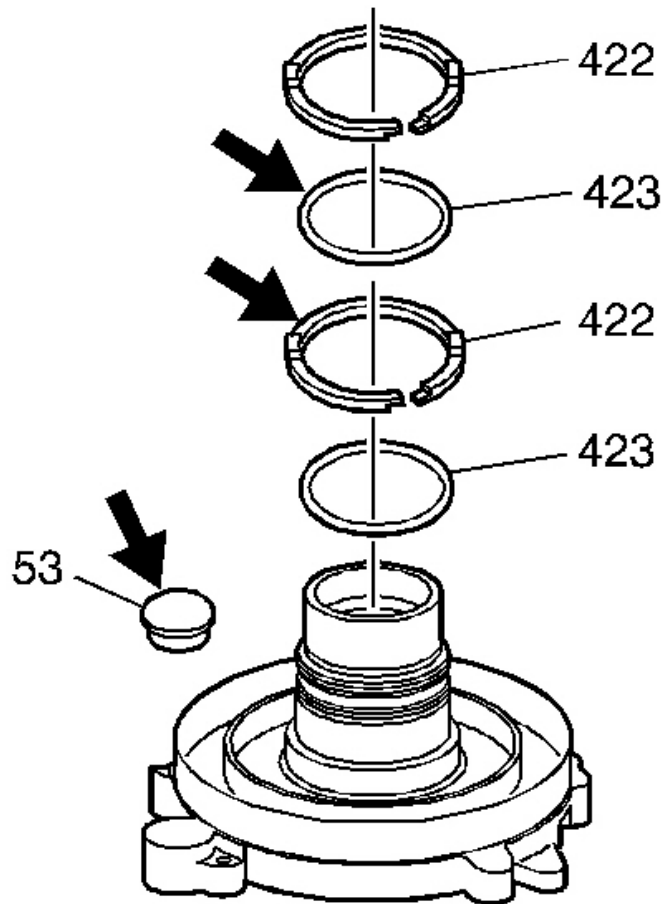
Locating Inspection Points On Sealing Rings & Scavenge Tube Seal
